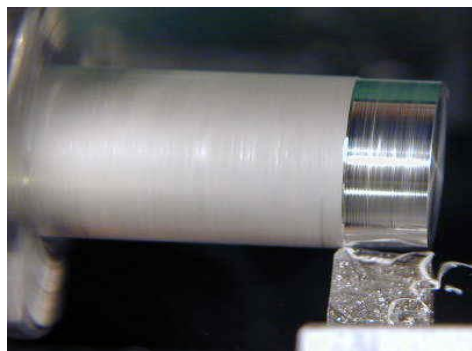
Reduction process of steel/rod on a Lathe Machine
